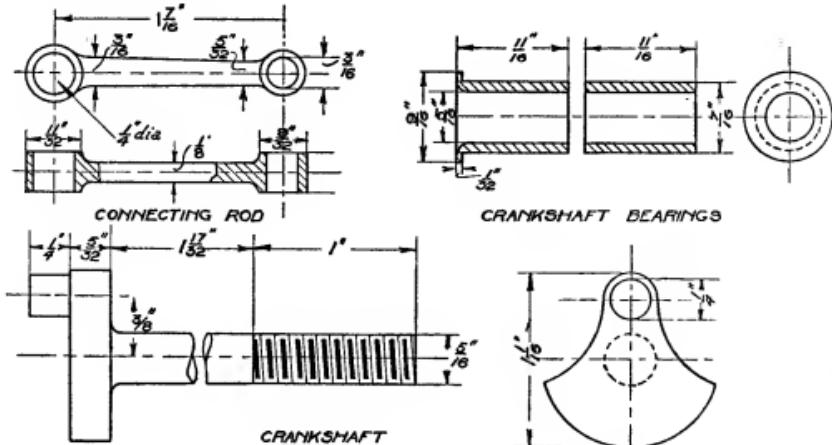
Details of the connecting-rod, main bearings, and crankshaft
